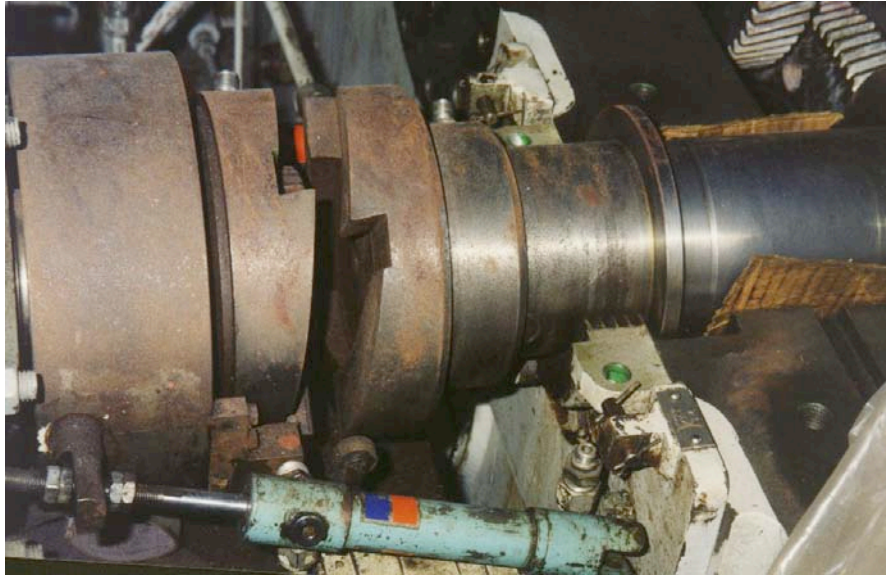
Typical hydraulically engaged jaw clutch for MS5001N-P (shown disengaged)
